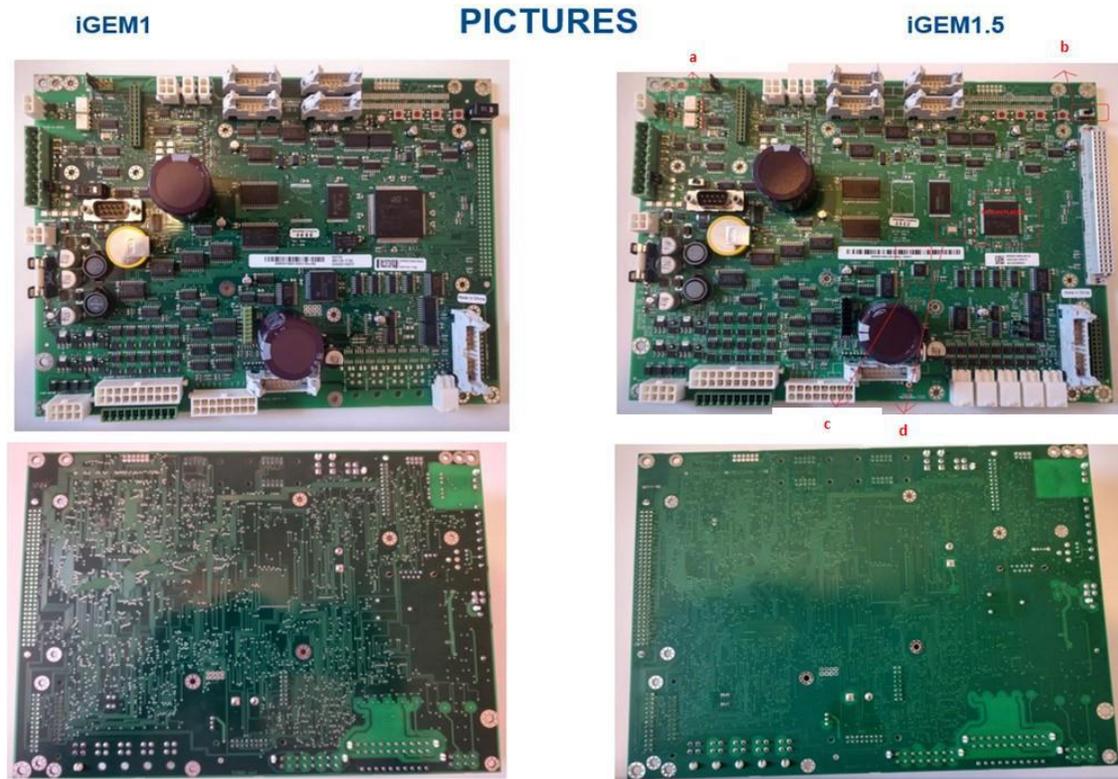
iGEM 1 and iGEM 1.5 boards | Cartes électroniques iGEM 1 et iGEM 1.5
